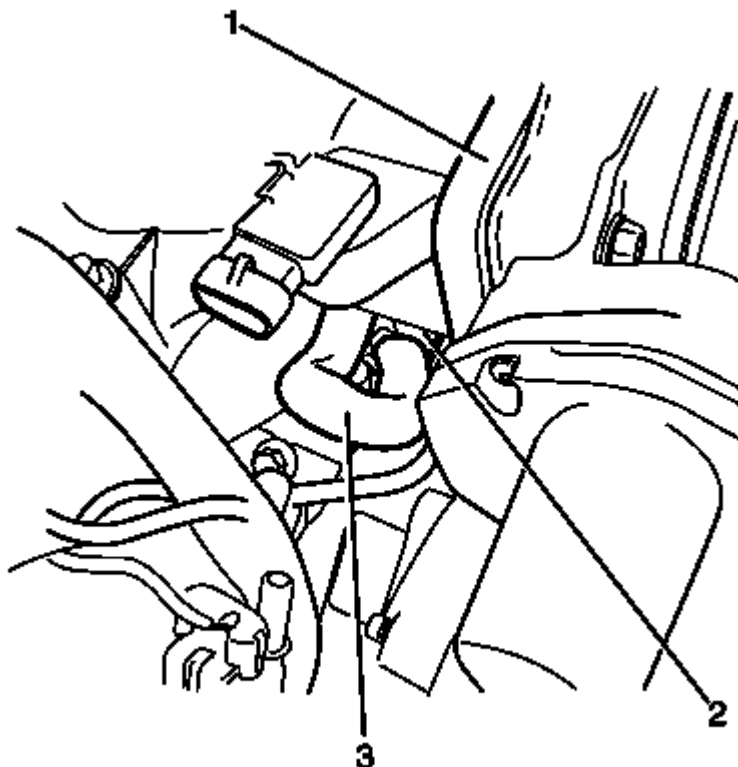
Locating PCV Hose, Intake Manifold & Valley Cover
